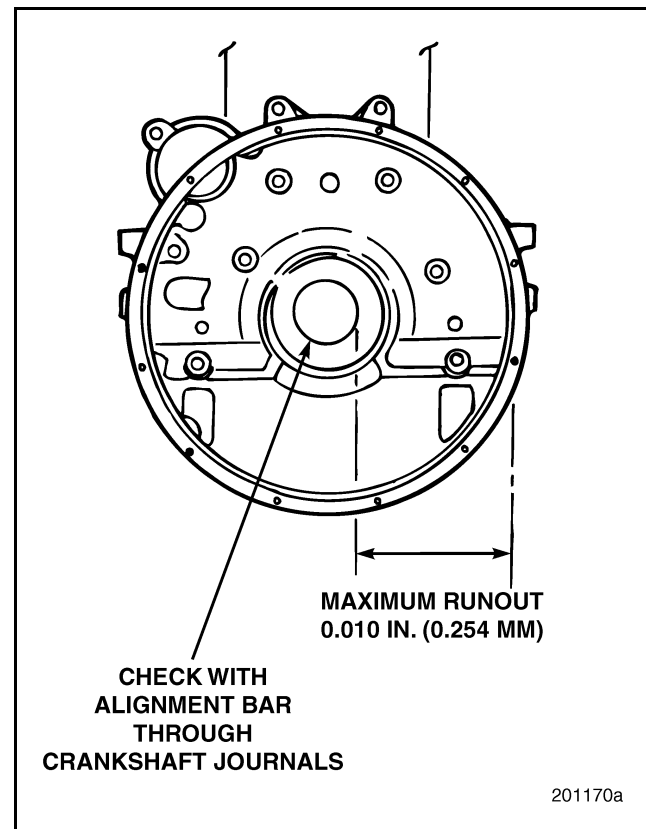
Flywheel Housing Runout Check with Alignment Bar
